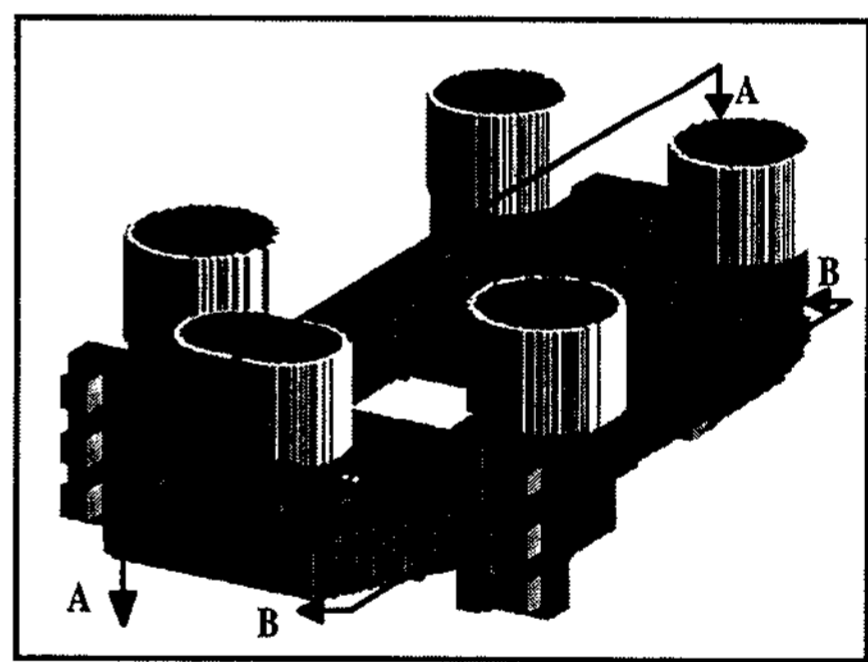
A 3-dimensional mesh diagram of a mill housing.
